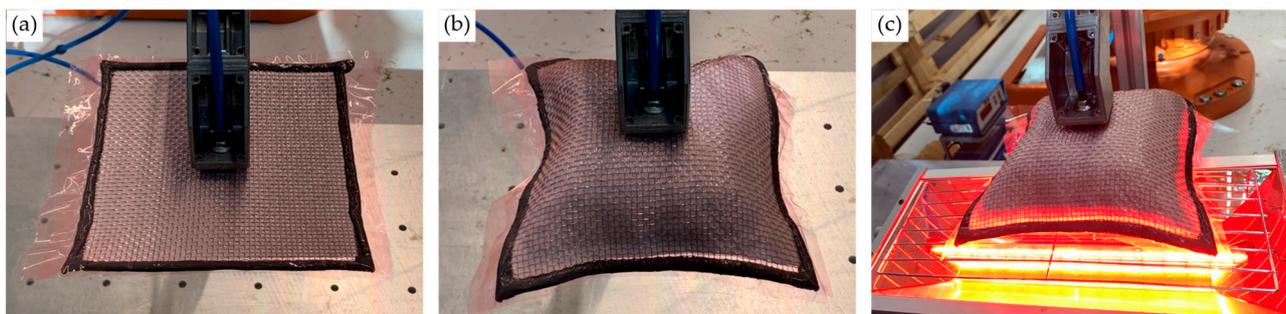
(a) Clamped and vacuumed layup of commingled yarn fabric, peel ply, separating foil, breather fleece, and metal wire mesh enclosed in bagging film. (b) Dielessly formed doubly curved shape. (c) Heating the vacuumed and formed layup with an infrared heater for impregnation.
